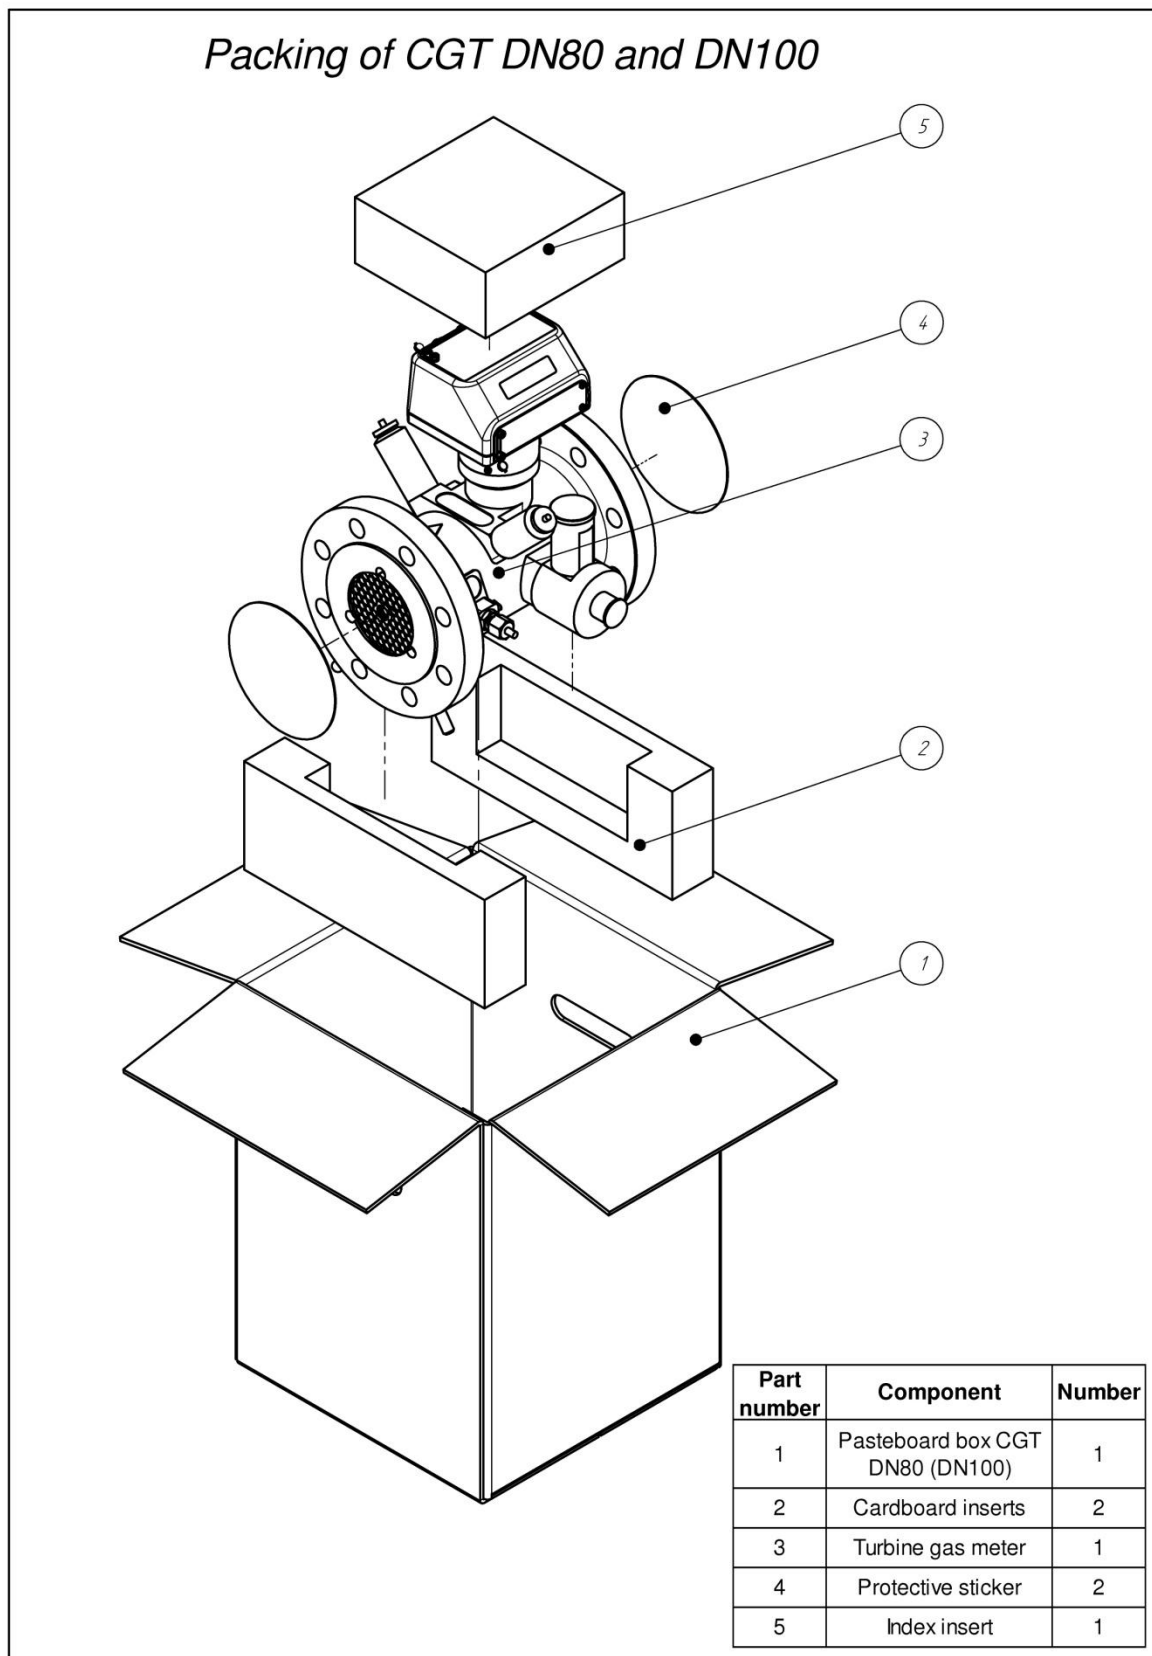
Packaging of the DN80 and DN100 turbine gas meters.
